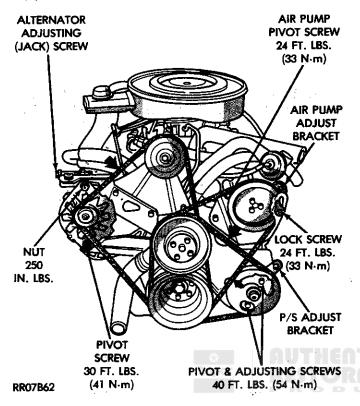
Accessory Drive System—3.9L, 5.2L Engines and 5.9L Engines Low Duty Cycle
